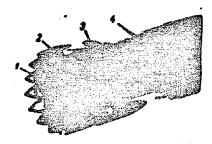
View of the lower end of the bit head of a bore eller after making 5 holes 80 mm deep in a solid comment wheel.
